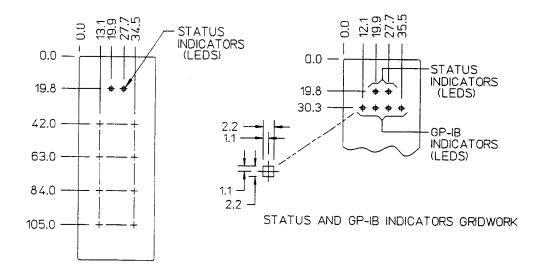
MODULE FRONT 8 COMPONENT GRIDWORK, 1 SLOT MODULE
